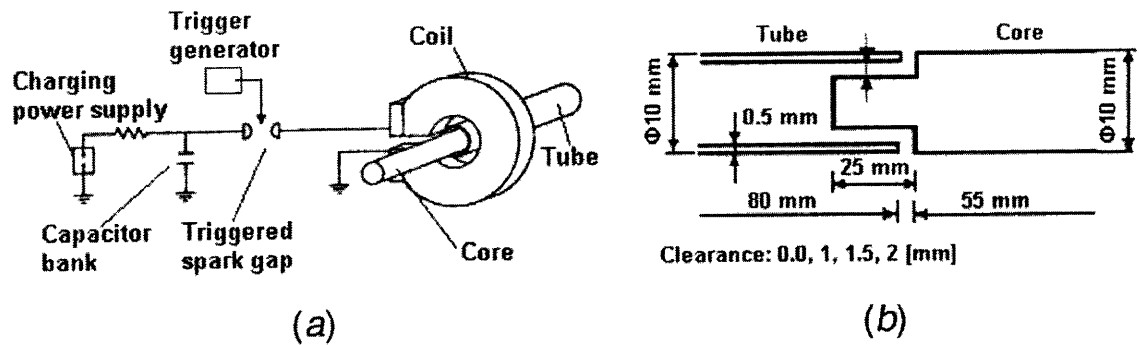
a) Shows another view of the circuit attached to a 3D graphic of the coil and workpiece setup. b) Shows a cross-section of the two workpieces the “tube” (accelerated workpiece) and the “core” (stationary workpiece) [5].
